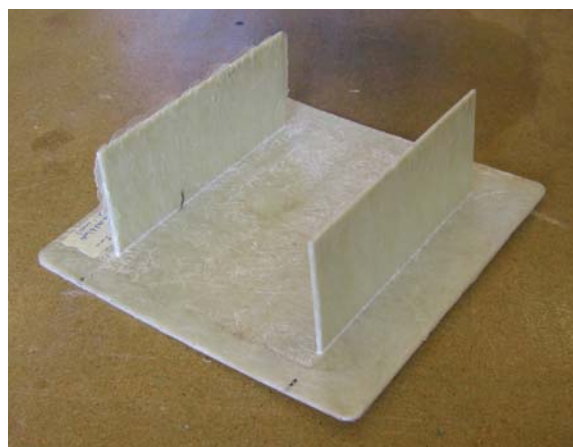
Molded TP-P4 blank using a deep-rib compression-molding tool.
